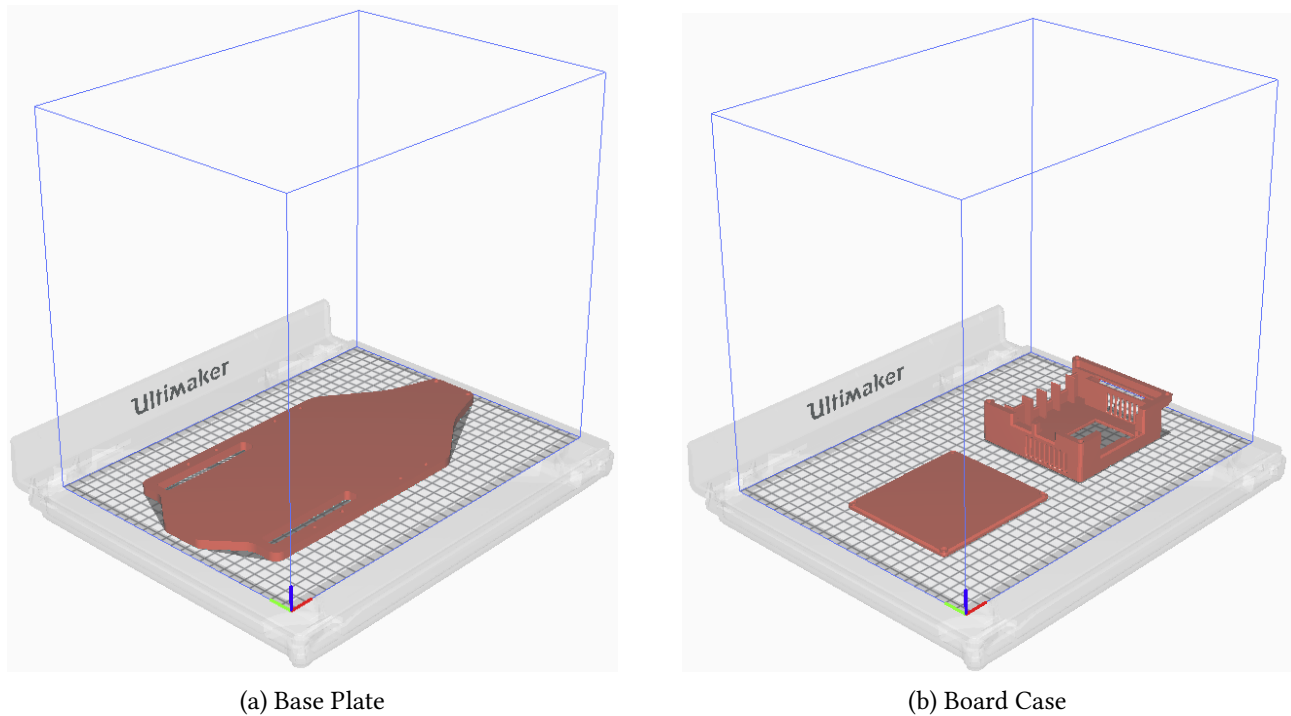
(a), (b) The 3D printed parts required for the platform upgrade
